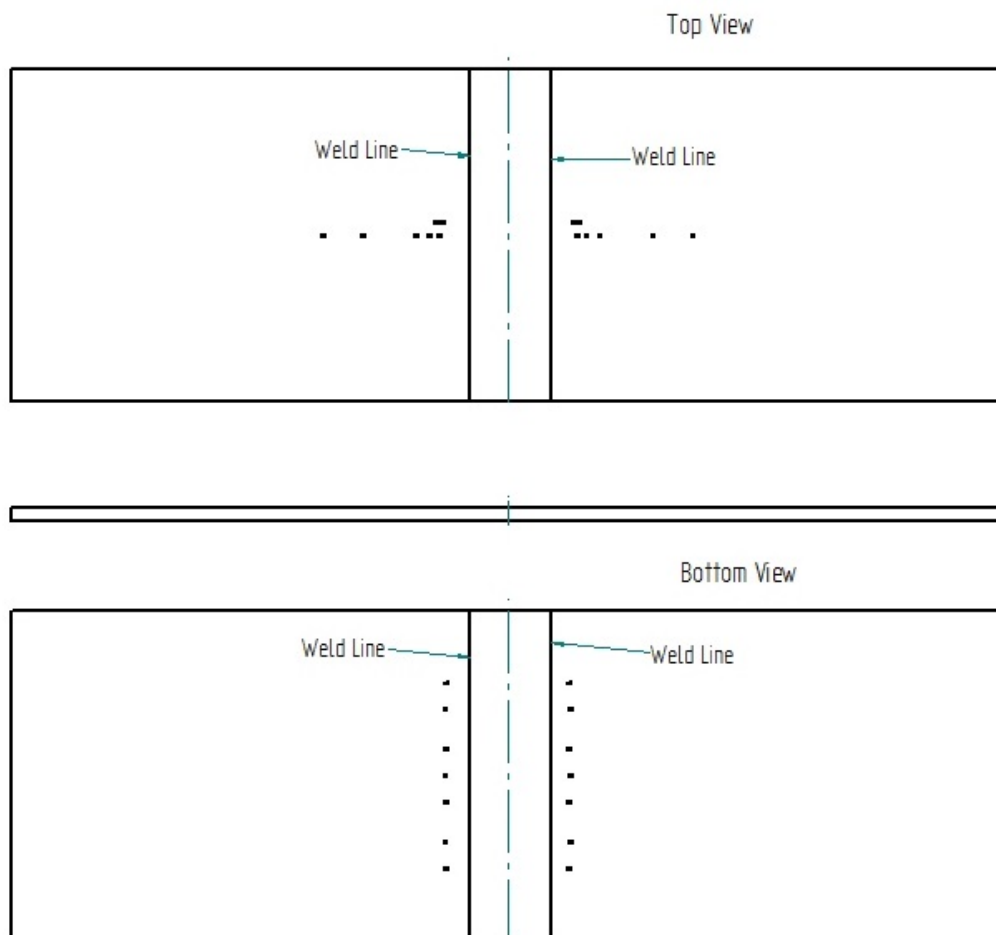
Drawing of the hole positions machined to keep in place the thermocouples during welding tests. In the top face of the plates a series of holes at different distances from the weld line have been machined, in the bottom face the holes are at two different distances but with different depths
